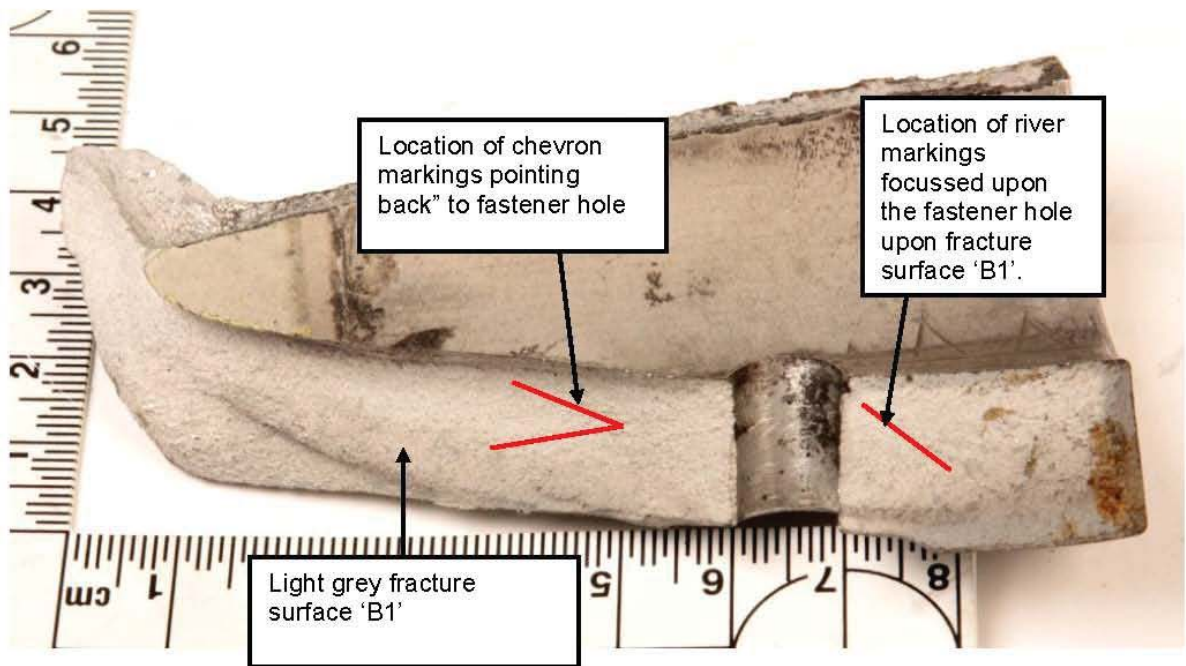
Showing the as received remnant 'B' of the undercarriage cylinder and fracture surface 'B1'.
